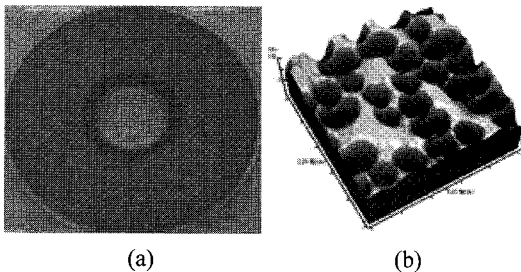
(a) fabricated blu-ray disc and (b) AFM image of injection molded patterns on blu-ray disc
